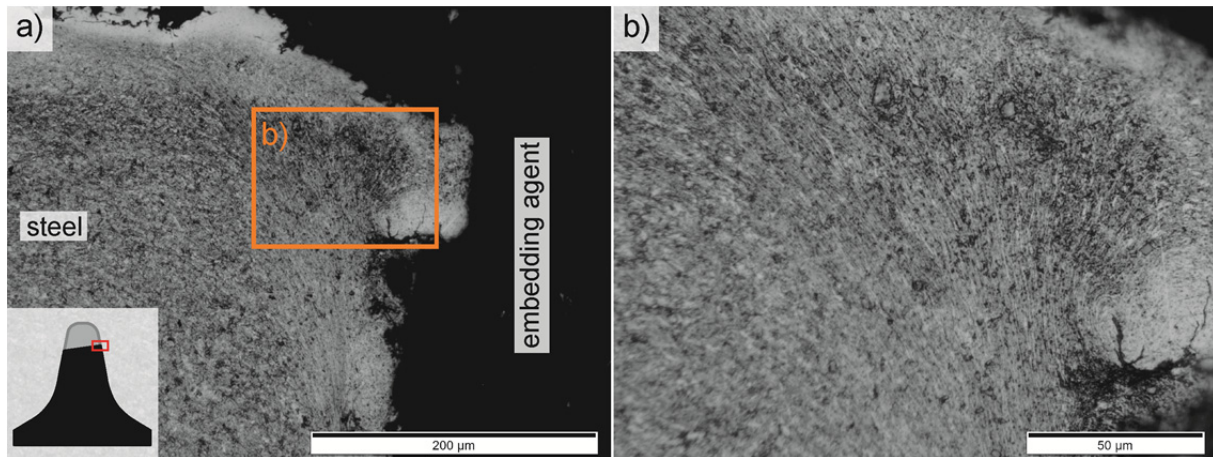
TBM disc cutter 5837, showing the edge of a blocked cutter ring.
